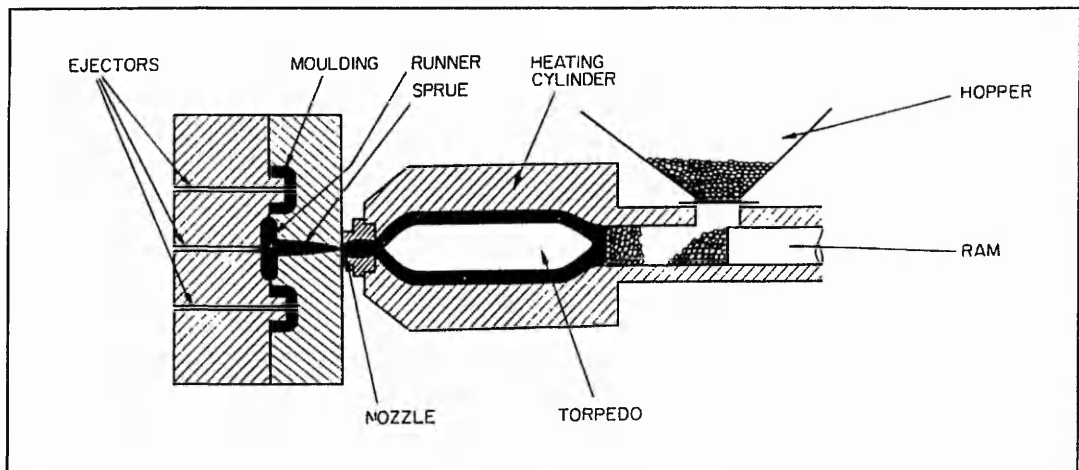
Injection moulding machine incorporating a torpedo inside the heating cylinder.
